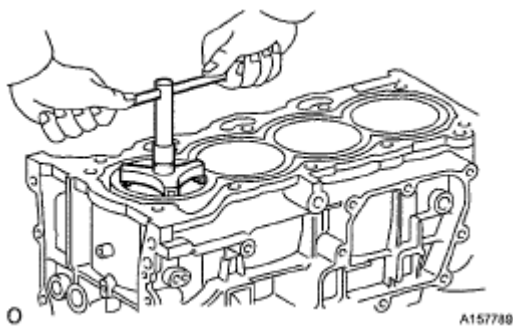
Removing Piston Sub-Assembly With Connecting Rod
